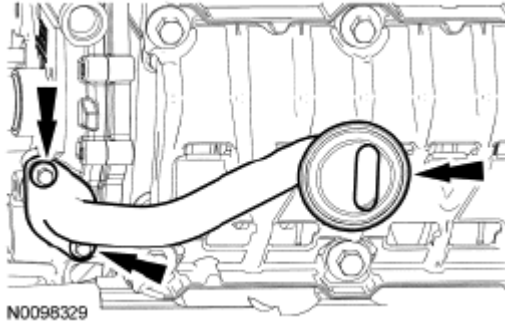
Locating Oil Pump Screen, Pickup Tube & Bolts
